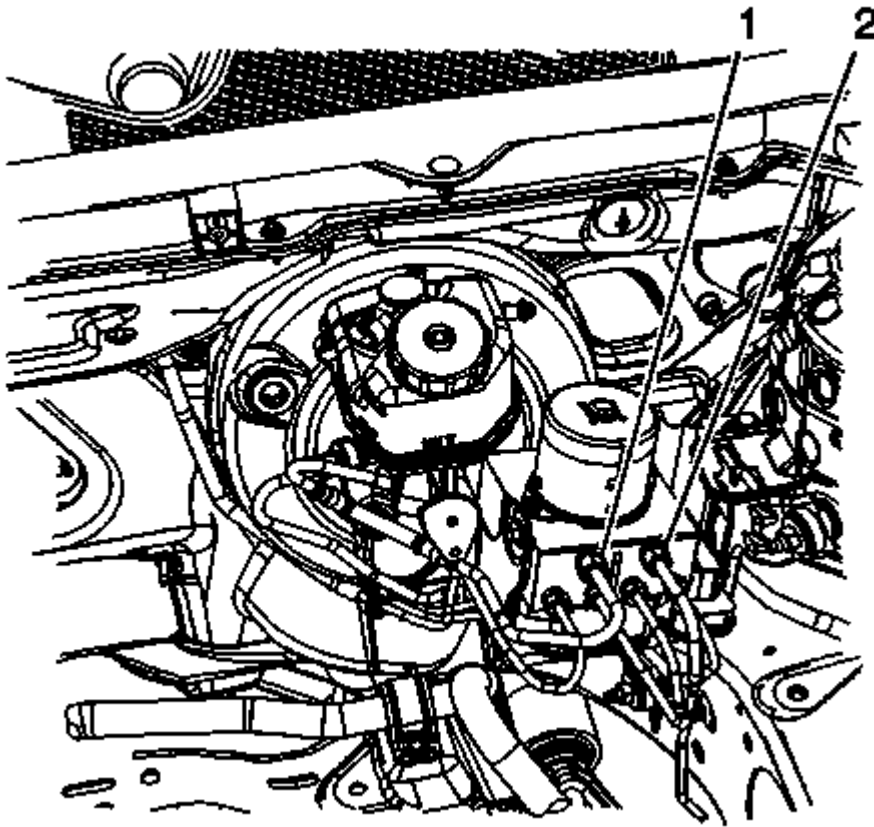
Master Cylinder Primary Brake Pipe Fitting
